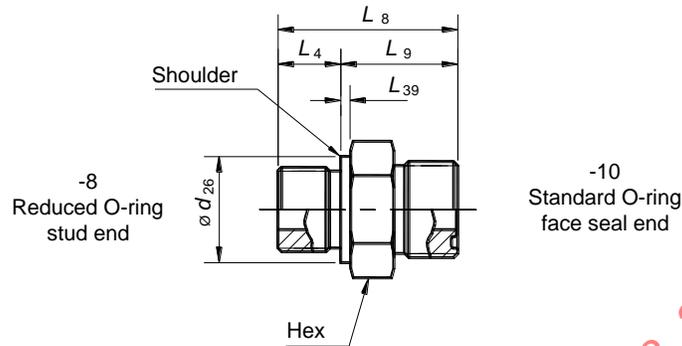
STUD STRAIGHT CONNECTOR WITH REDUCED O-RING STUD END
